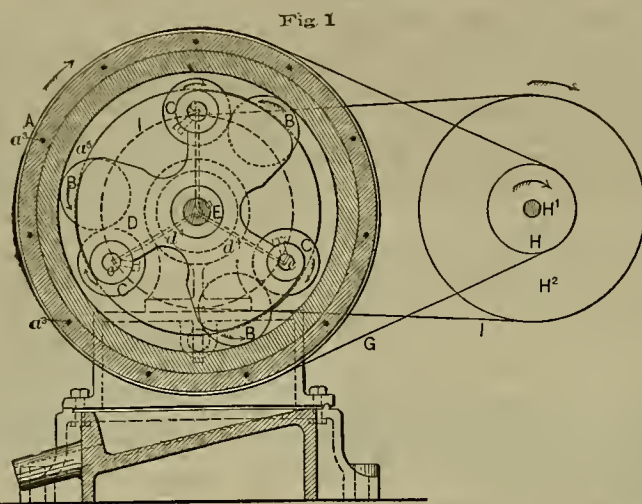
SECTION OF WARING PULVERATOR SHOWING CRUSHING AND PUSHING ROLLERS.
